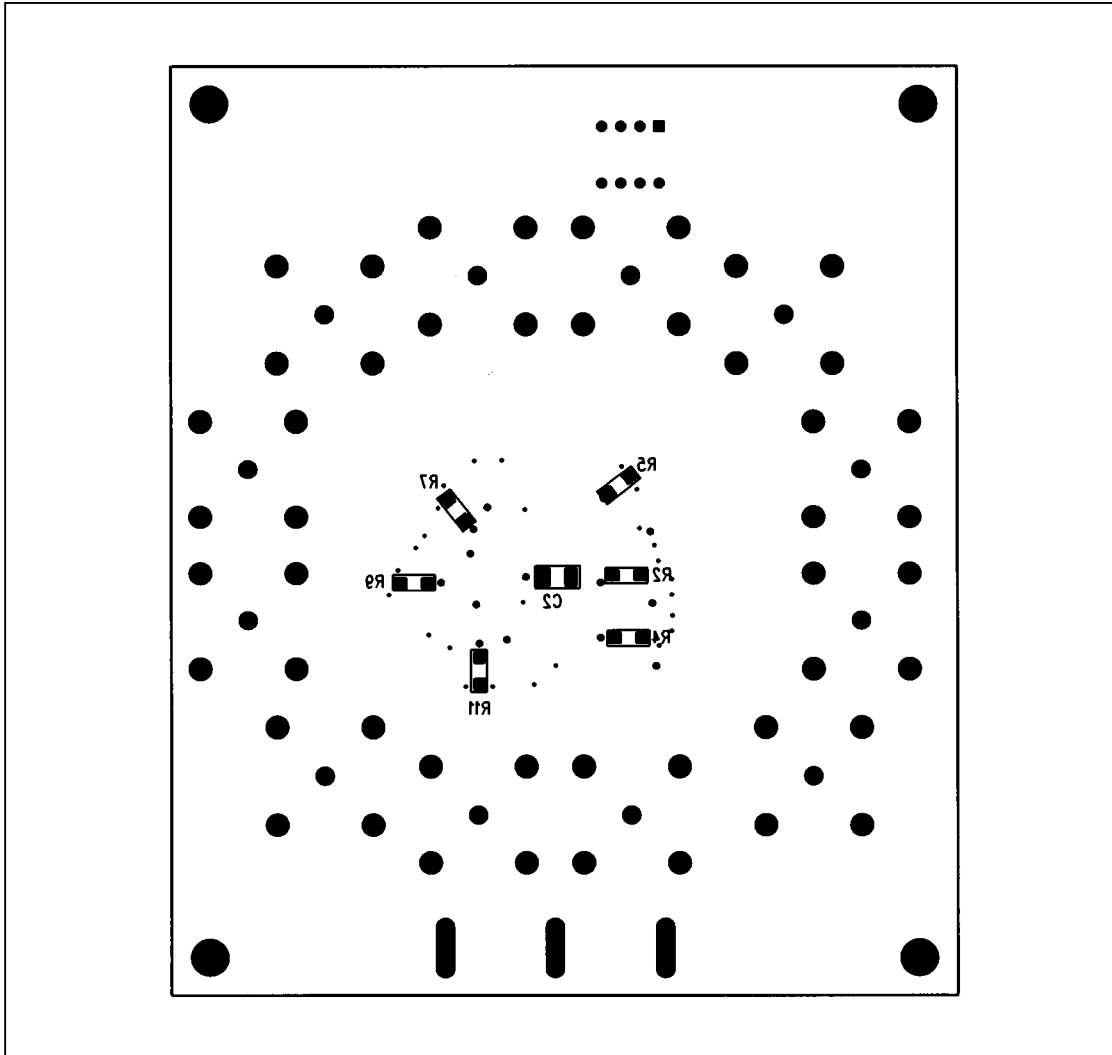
MAX464/MAX466 EV Kit Component Placement Guide—Solder Side
